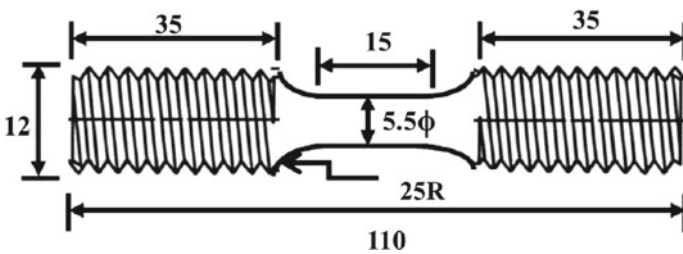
Geometry of the test sample used for ratcheting fatigue (Dimensions in mm)
